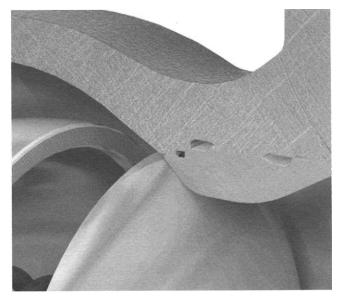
A high pressure poppet non-return valve seat detail Courtesy of Mokveld Valves BV
